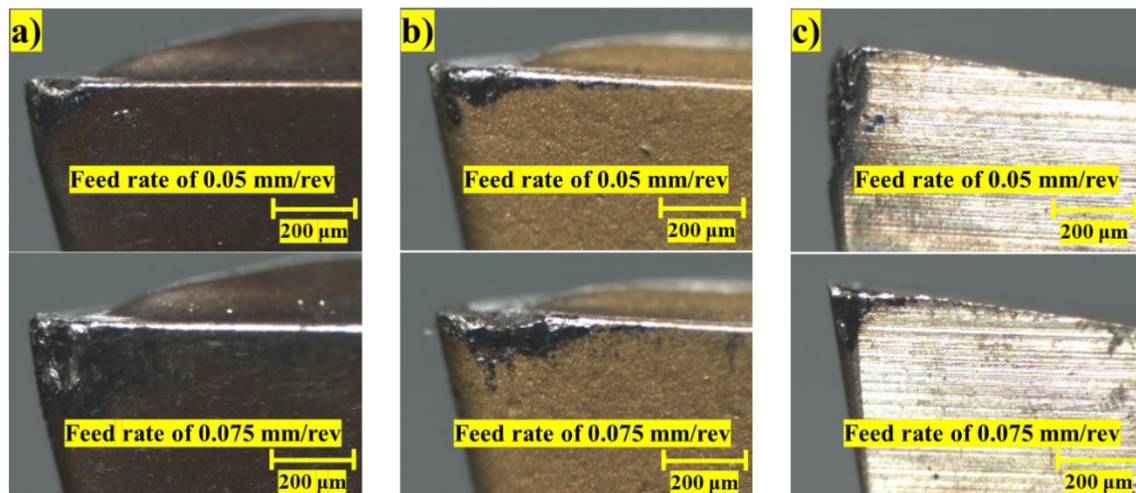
Tool wear images of different cutting tools in the cutting speed of 40 m/min, a) T1, b) T2, c) T3
